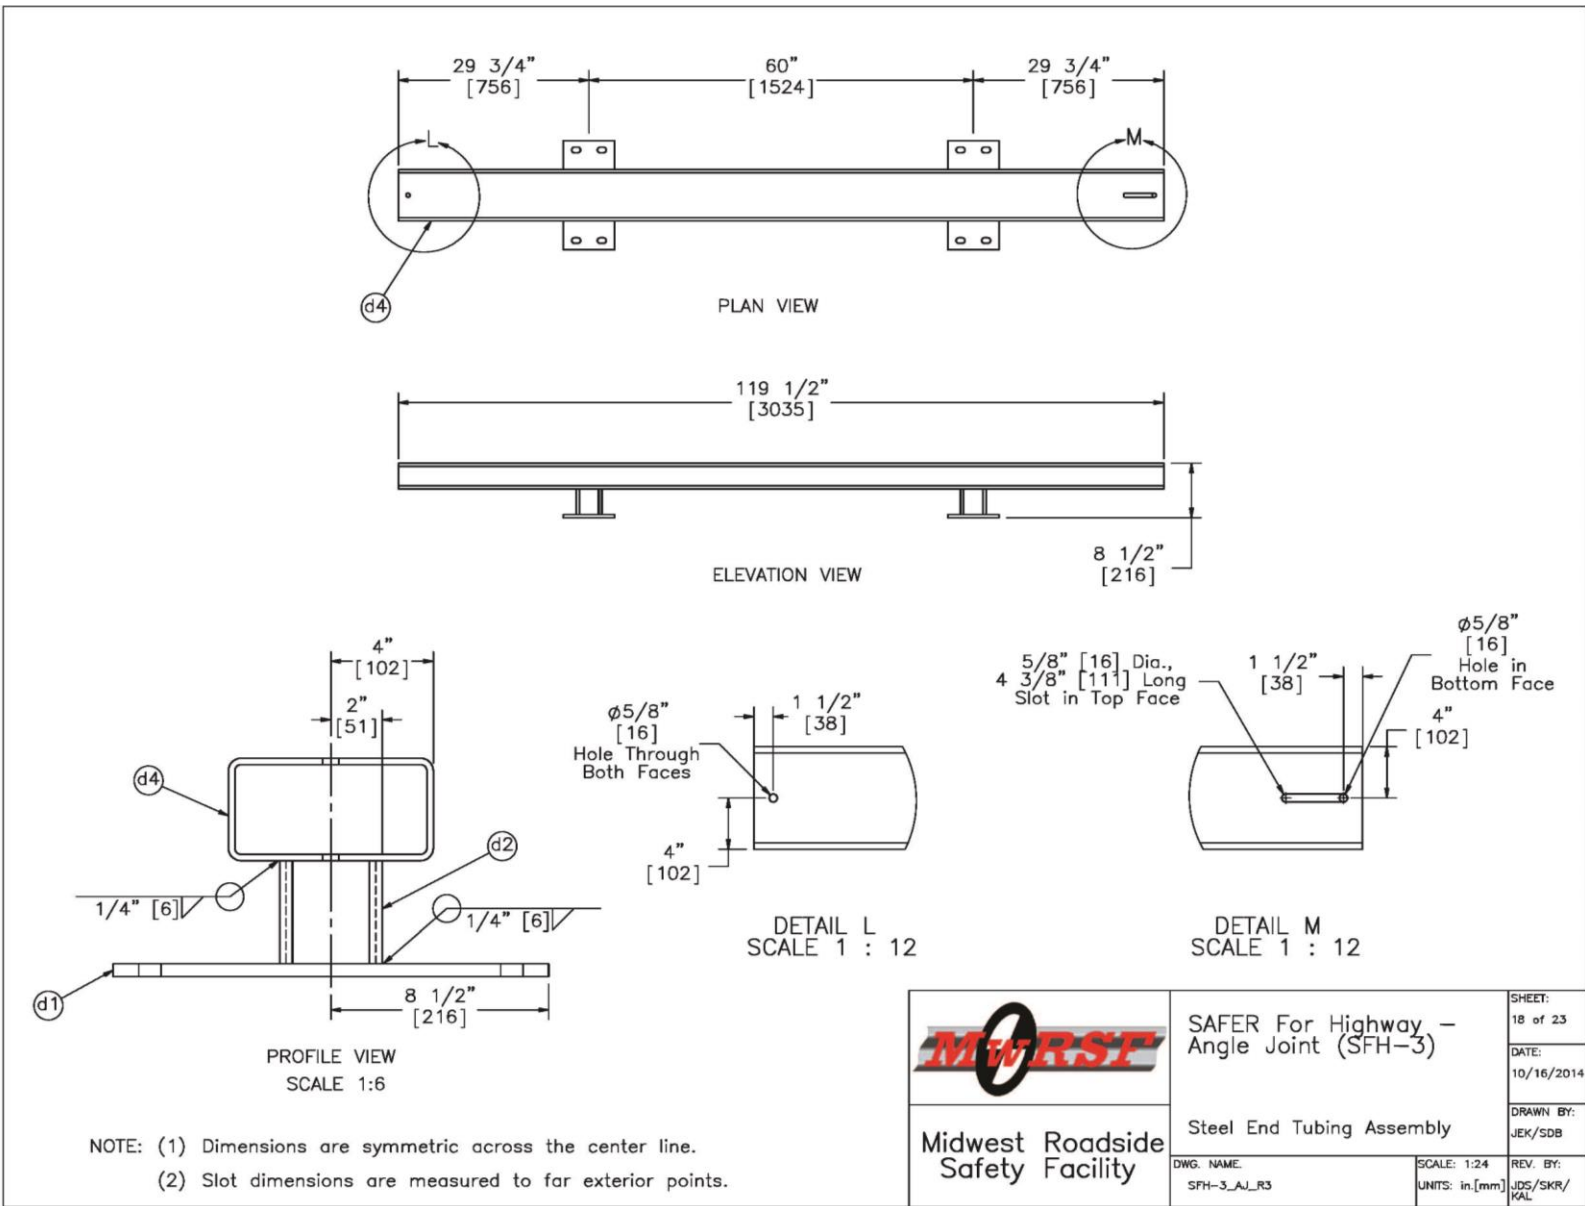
Steel End Tubing Assembly, Test No. SFH-3
